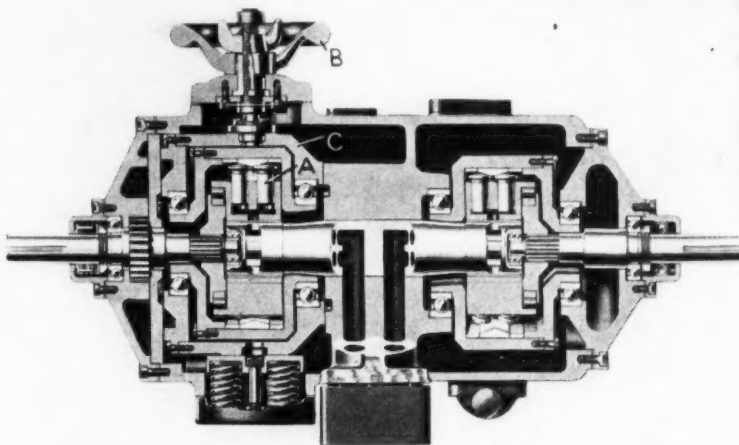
Plan View Section of Oilgear Transmission with Improved Piston Design
